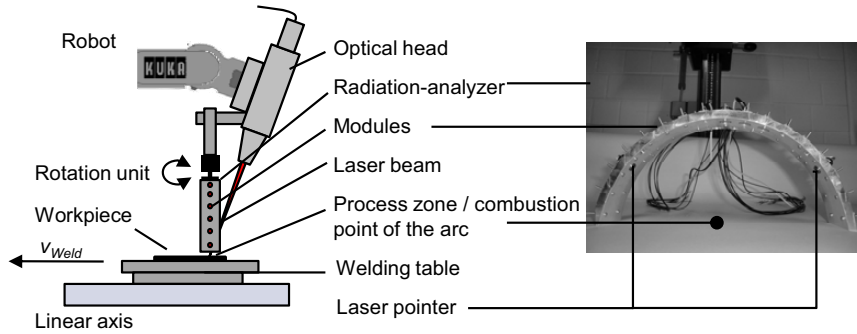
An 8 kW fiber laser welds the workpiece, which is moved by a linear axis. During the process the radiation-analyzer, which consists of 15 measurement modules, measures the reflected laser radiation in a hemisphere above the process zone. The measurement element in every module is a photodiode with a daylight filter blocking the process radiation
